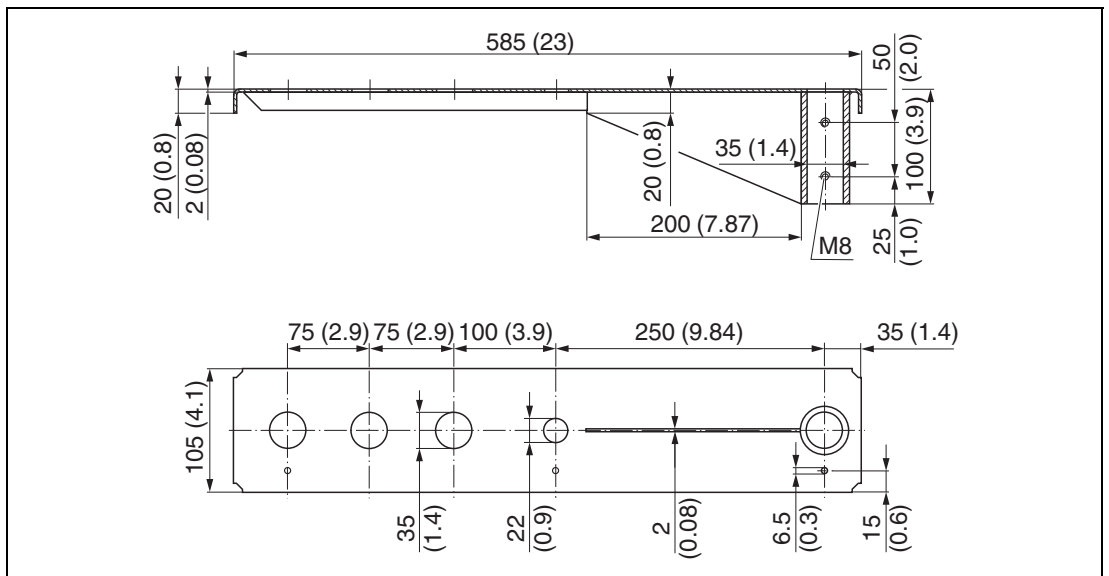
Dimensions of cantilever (short) with pivot for sensor process connection on rear, engineering unit: mm (inch)
